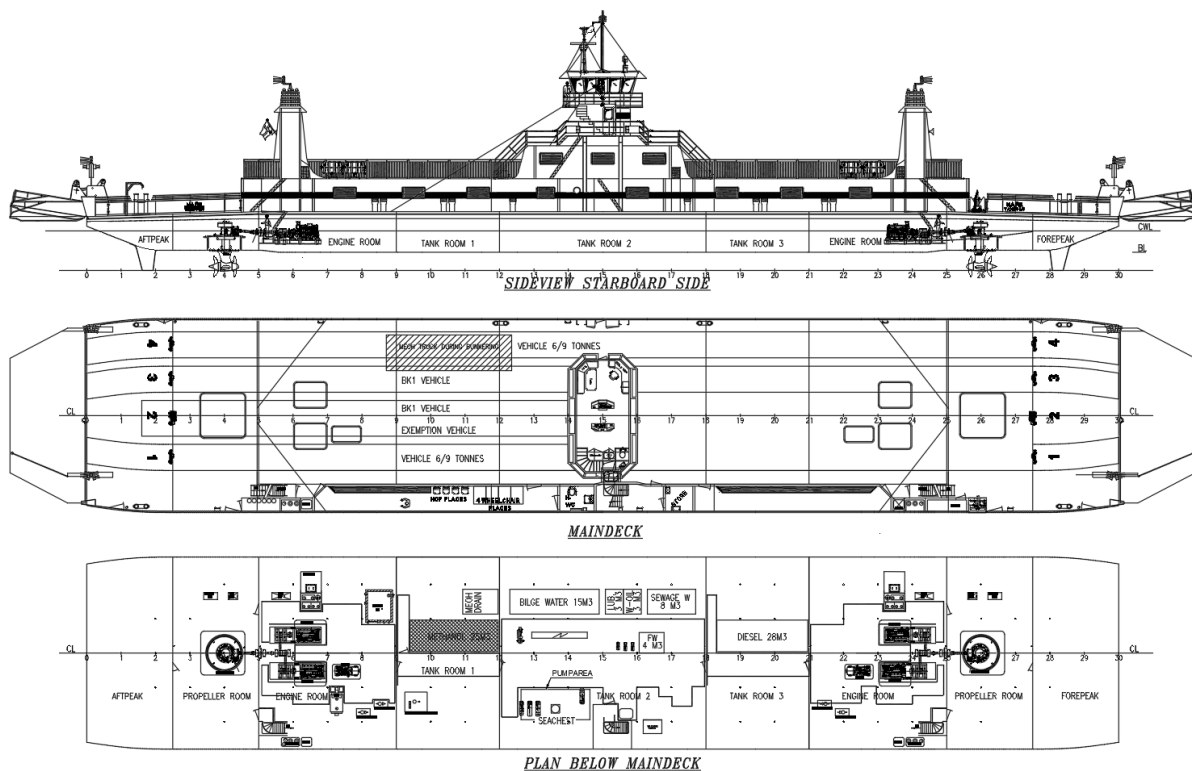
General overview of Jupiter. Tank room 1 will be converted to a methanol tank and pump room with a new water and gas tight bulkhead along the centre line. Methanol fuel pumps and other equipment on the fuel valve will be located inside the pump room. Individual double walled fuel pipes supply the propulsion engines forward and aft with methanol.
